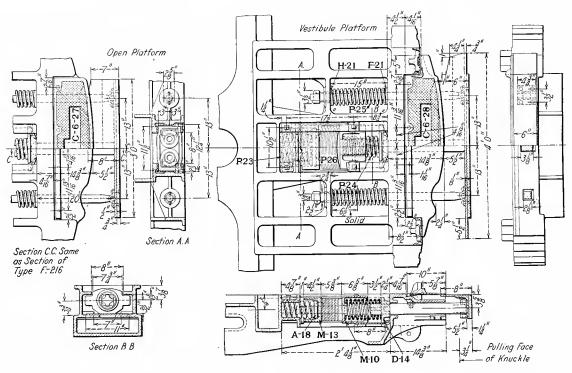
Application of Standard Steel Buffers to Cast Steel Platforms. Standard Coupler Company.
